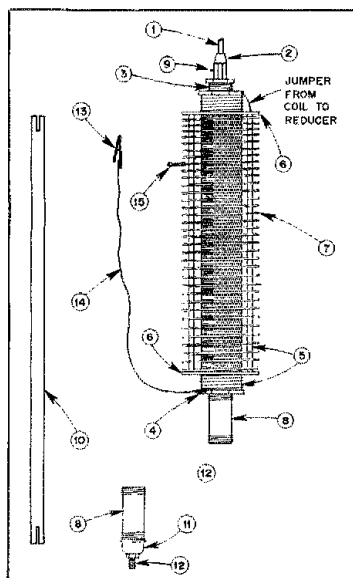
The completed coil assembly is shown here along with aluminum tubing mast. The inset shows the reducer which is threaded into the Plexiglas tubing. (Parts list is in Table 1.)
